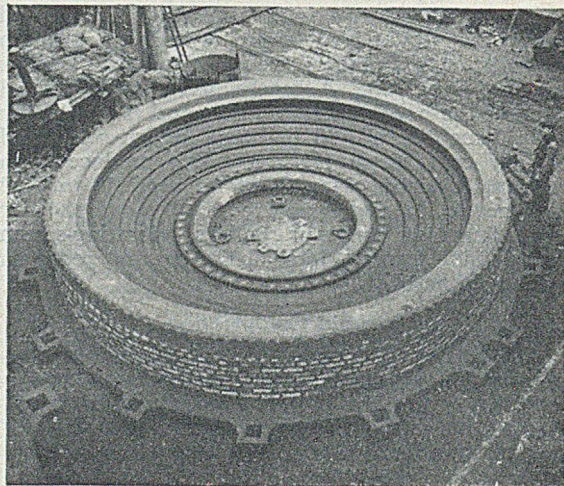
Electric Winding-engine Drum Mould, 18 ft. dia., ready for receiving the Spiral-cone Cores.
